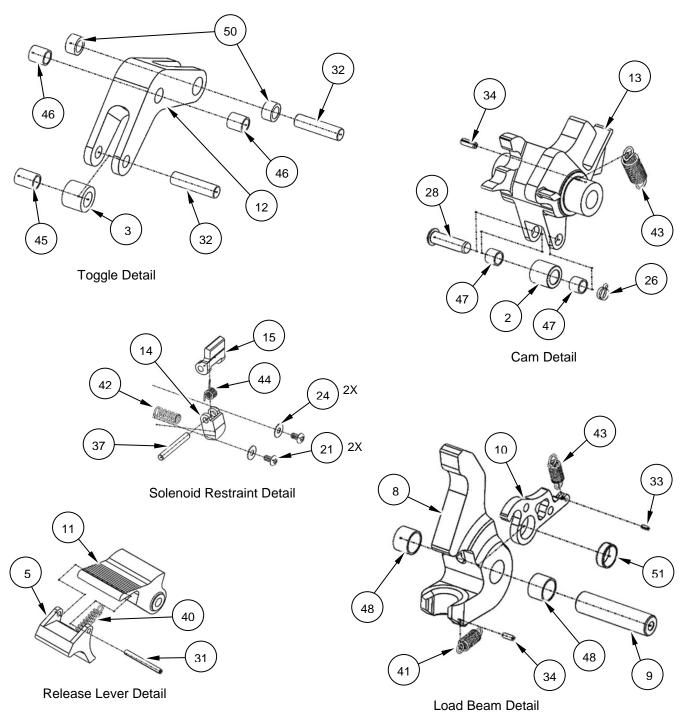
Auto-Loc Cargo Hook Subassembly Parts
